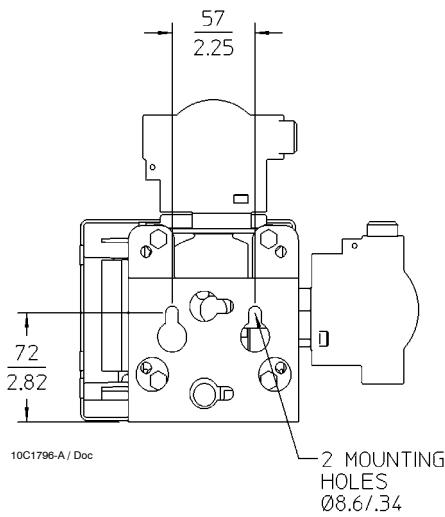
Type DVC6005 Base Unit with Mounting Bracket (Rear View)
